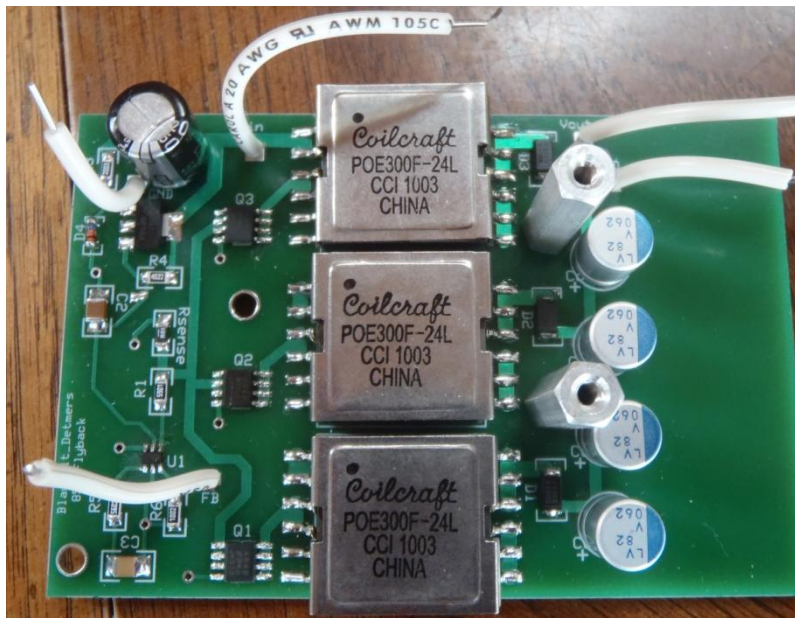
Printed circuit board of version 1.4 with components and testing leads soldered in place.
